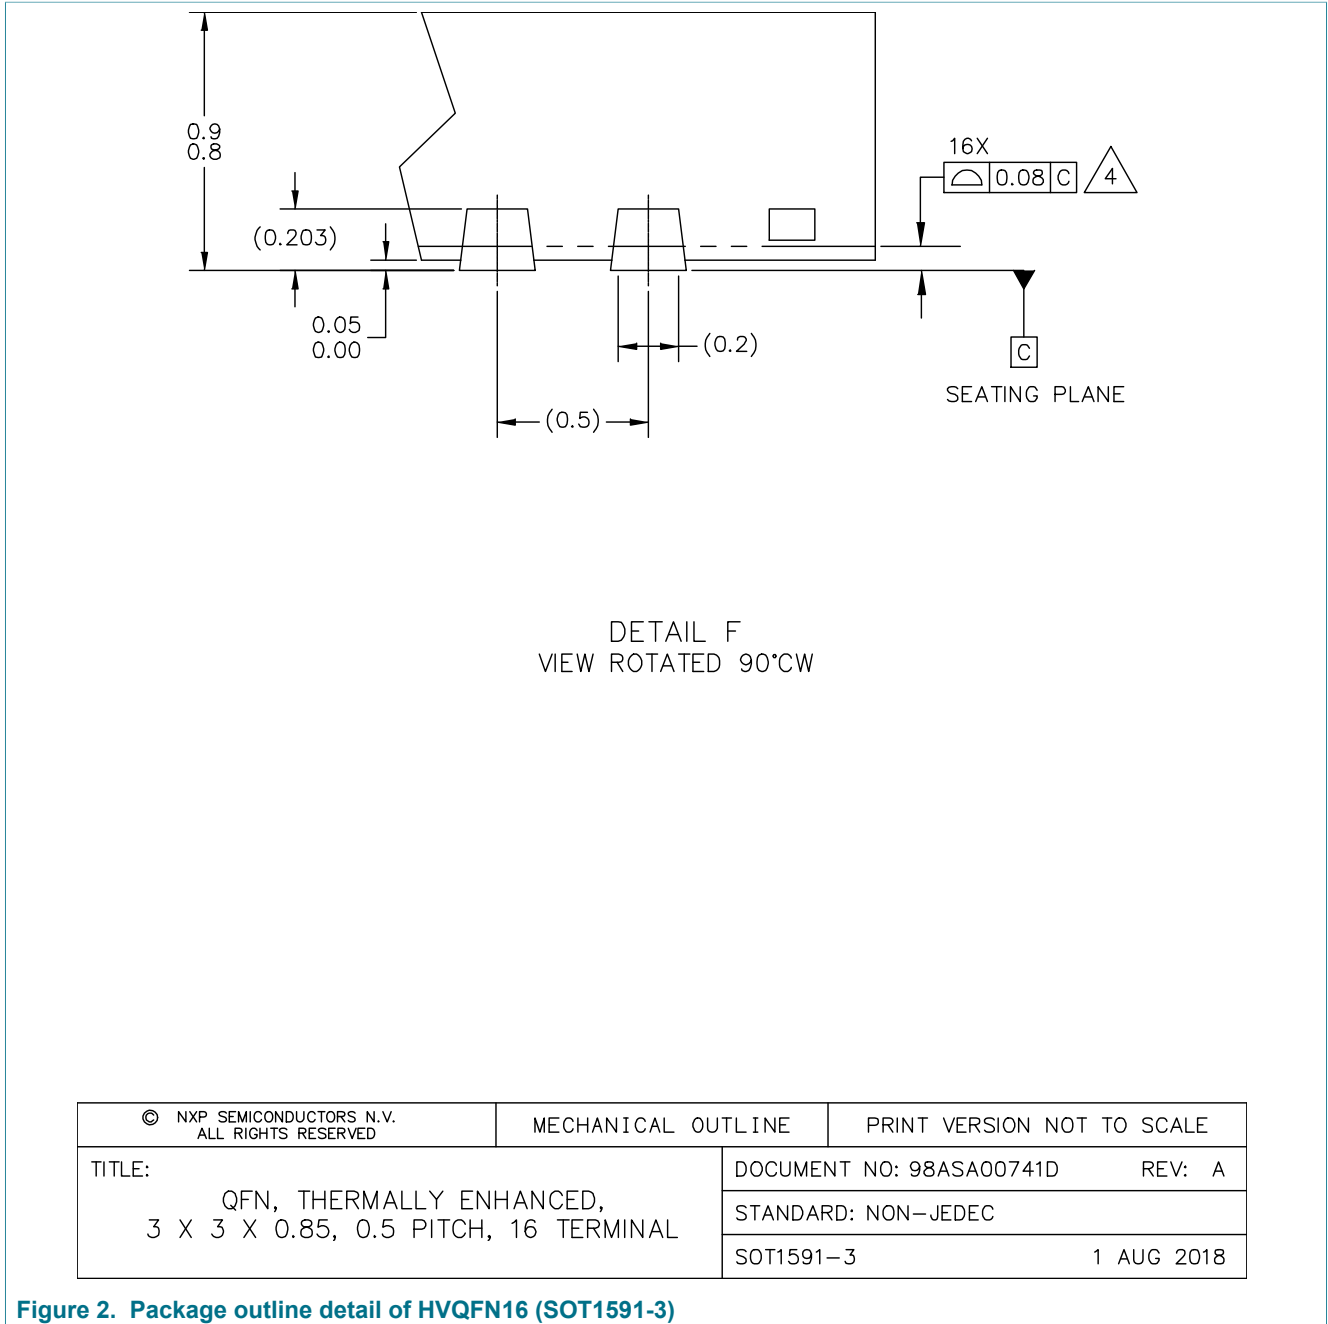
Package outline detail of HVQFN16 (SOT1591-3)
